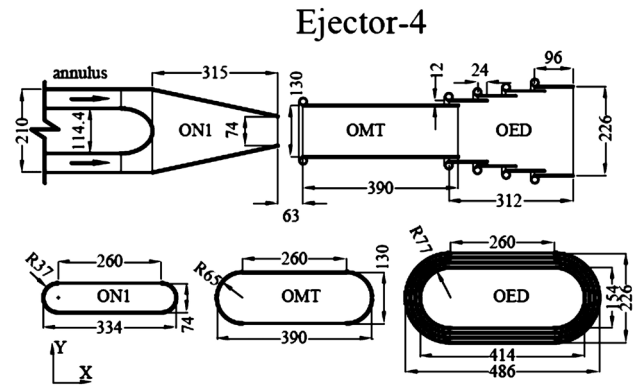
Dimensions (in mm) of Ejector 4 (E-4)
